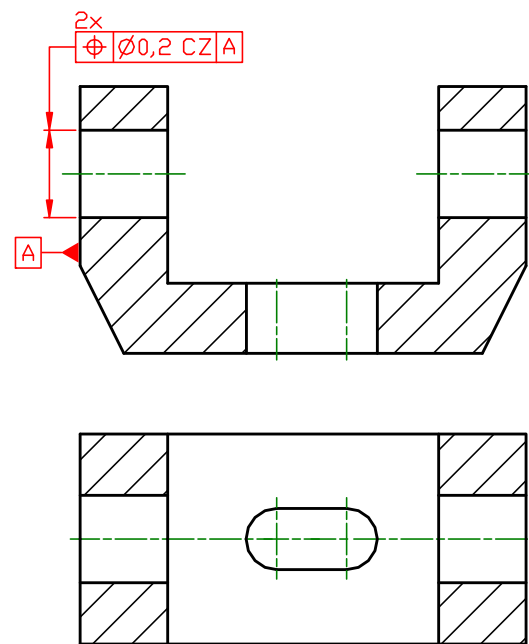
The position tolerance with the CZ modifier uniquely indicates that two toleranced axes together shall be perpendicular to datum A—the recommended specification that shall be used instead of the specification shown in Figure 19.
